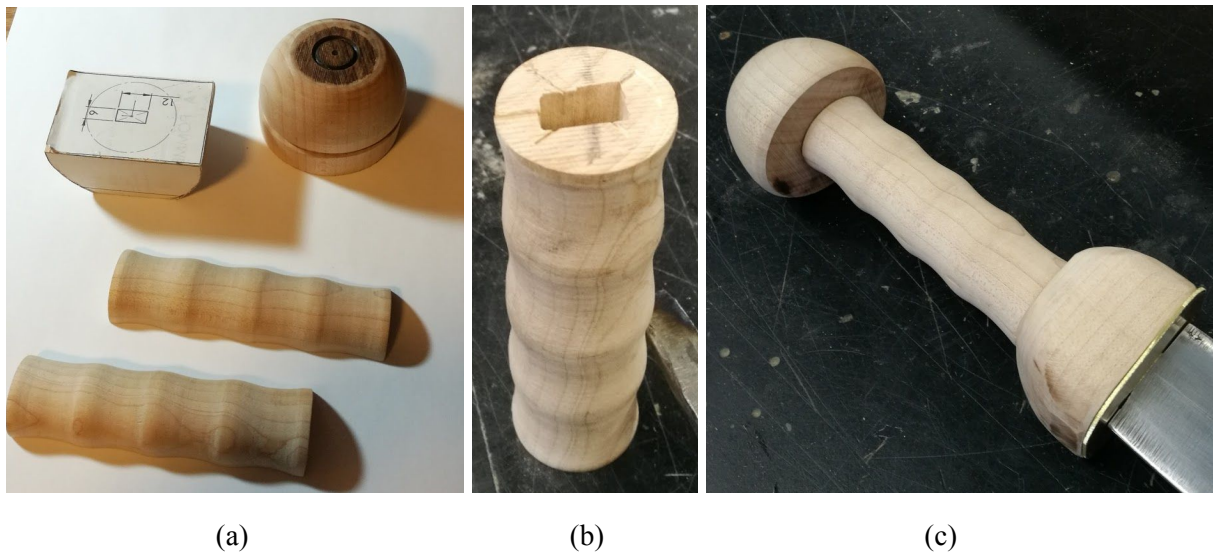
(a) Grip and Pommel Shape, (b) Grip Halves Glued Together, (c) Test Fitting Hilt Components.
